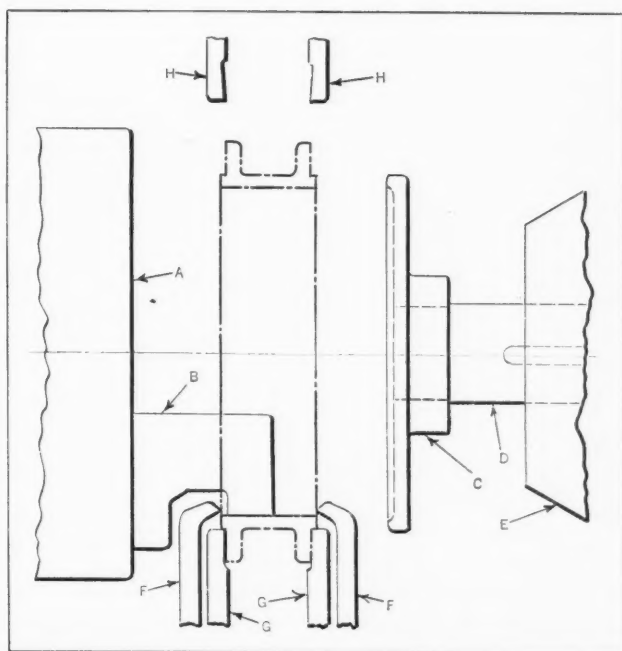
Method of Chucking and Squaring Work for Turning and Facing Cuts
